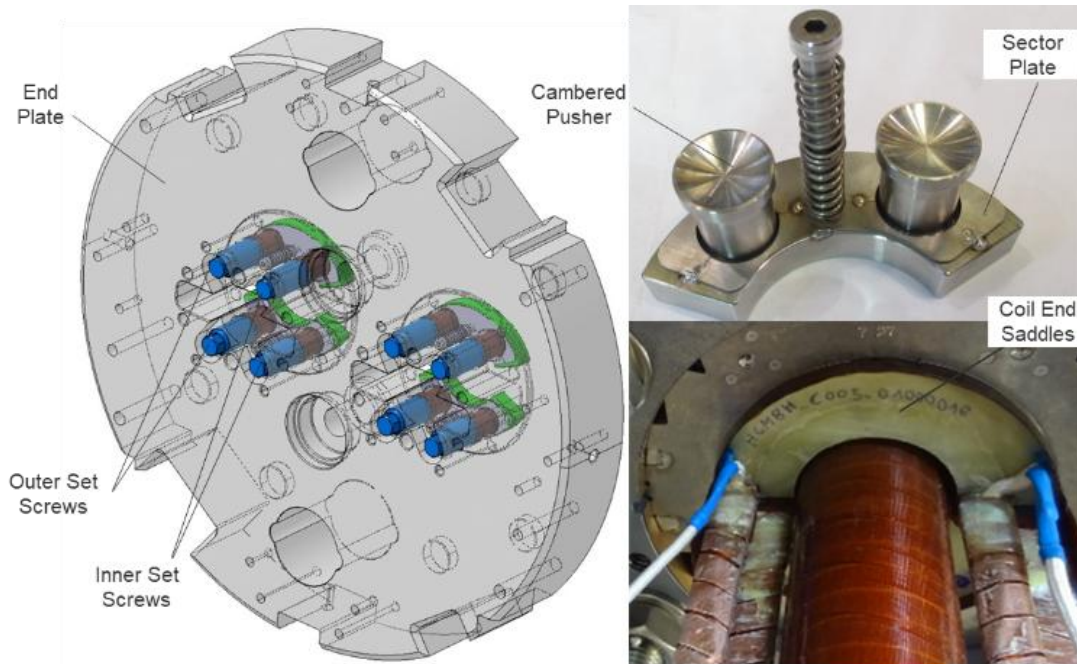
Details of longitudinal support and loading of 5.3-m-long, 60-mm two-in-one-aperture, HL-LHC 11 T dipole magnet at CERN. Left: stainless-steel end plates featuring 2 x 4 stainless-steel set screws. Top right: view of stainless-steel pushers and sector plate. Bottom right: view of a coil end featuring the extremities of the inner- and outer-layer G11 saddles (Courtesy of H. Prin and F. Savary, CERN).
